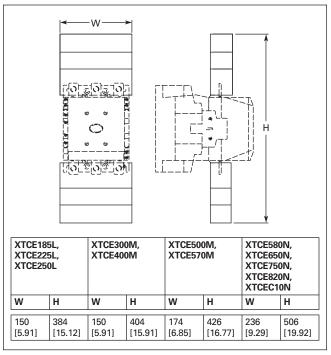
Frame L - N Contactors, XTCE185L - XTCEC10N, with Terminal Shroud XTLEXTS - Approximate Dimensions in mm [in]
